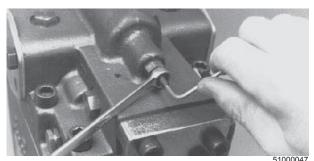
Adjusting Control Threshold (Type HP)
